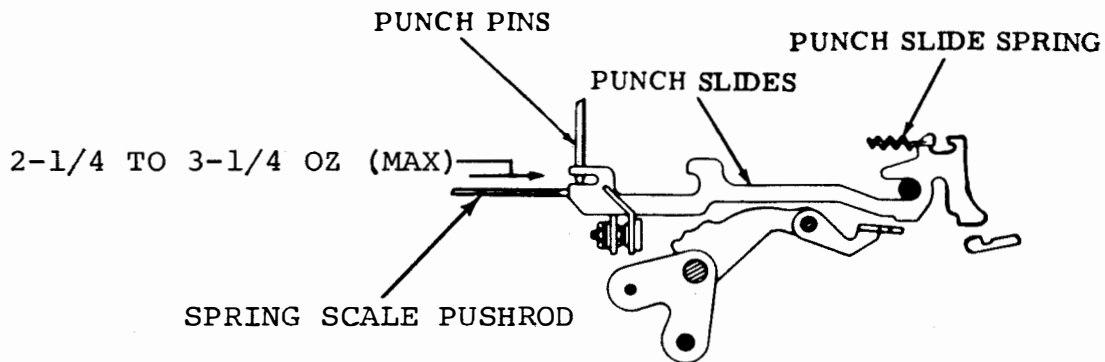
Punch Slide Spring (For Fully Perforated Tape), Front View
